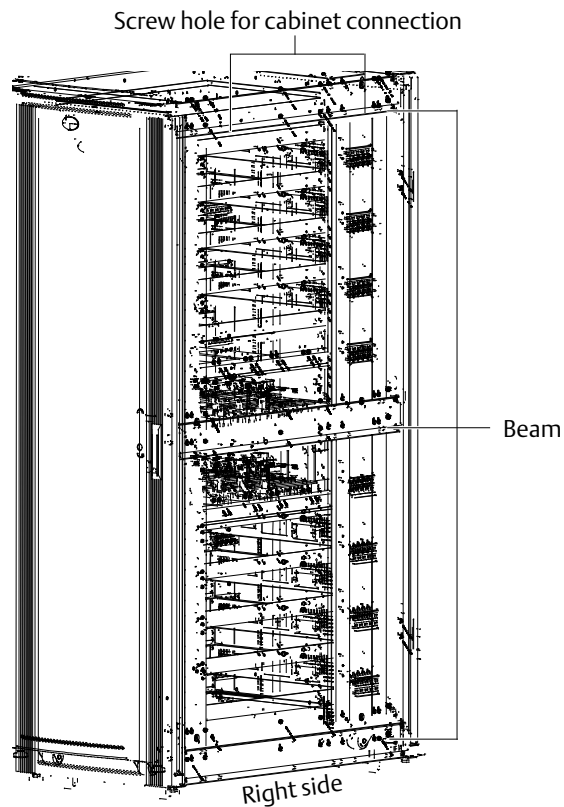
Screw holes for cabinet connection on main power cabinet
